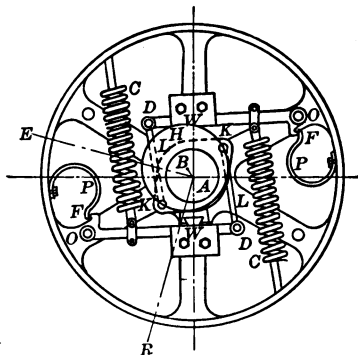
BUCKEYE SHAFT GOVERNOR, ROTATING ECCENTRIC
